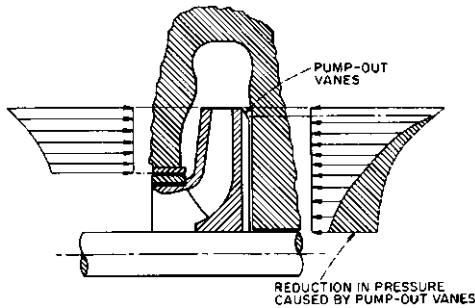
Pump-out vanes used in a single-suction impeller to reduce axial thrust
